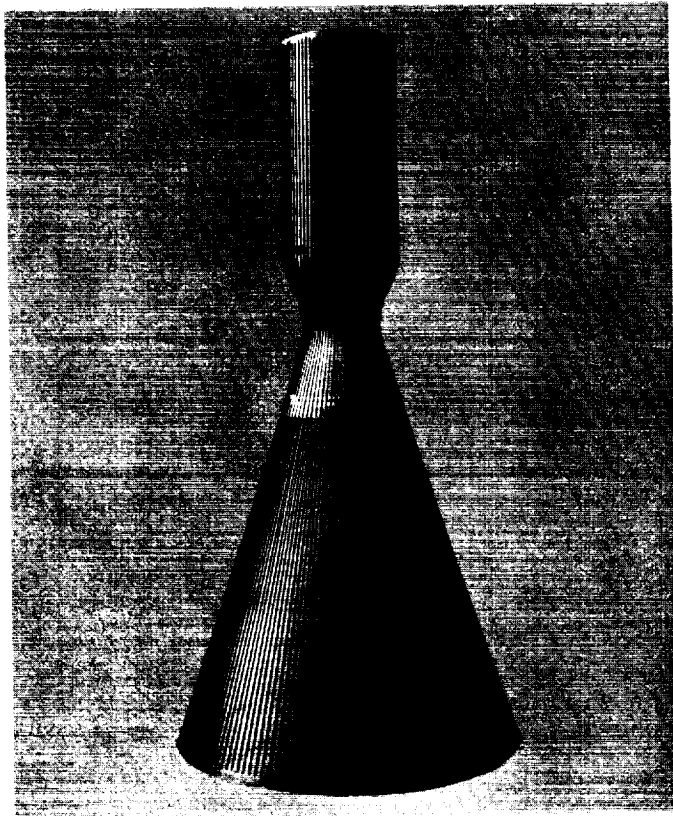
Ribbed Liner, Welded Rib Thrust Chamber
